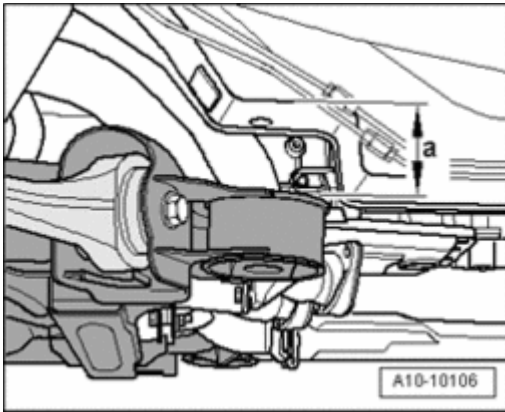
Lowering/Lifting Engine/Transmission Assembly Using Scissor Lift Platform VAS 6131 Only Approx. By Dimension
